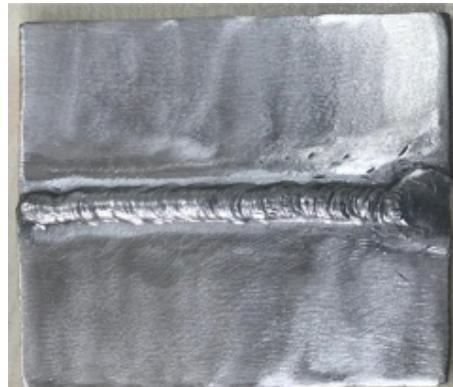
Weld Seam Cleaning in Aluminum Welding
